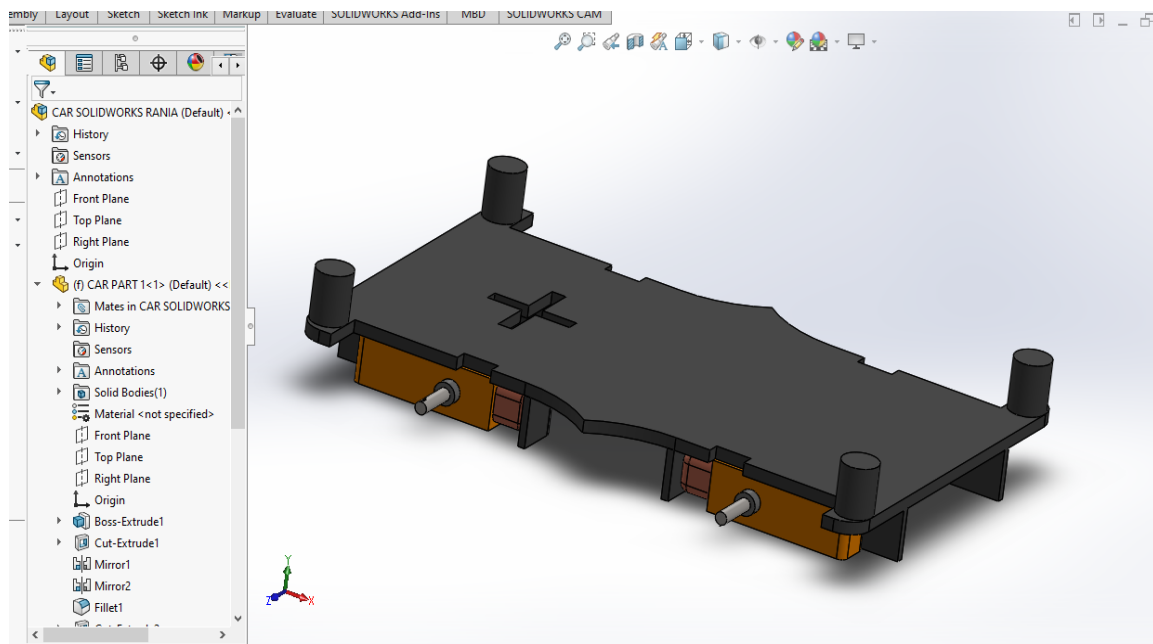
Assembly of Chassis and DC motors of CleanRayX
